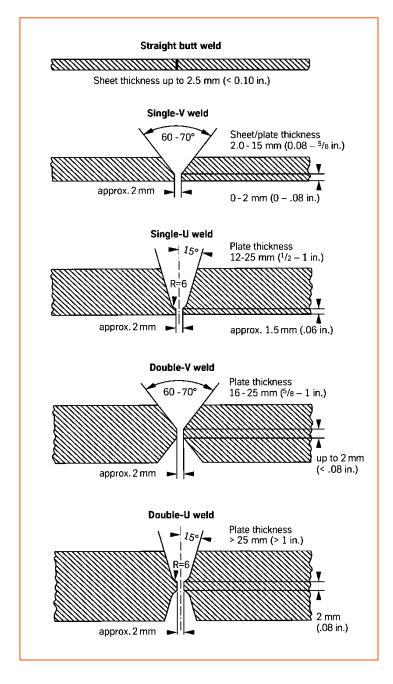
Edge preparation for welding nickel alloys and special stainless steels
